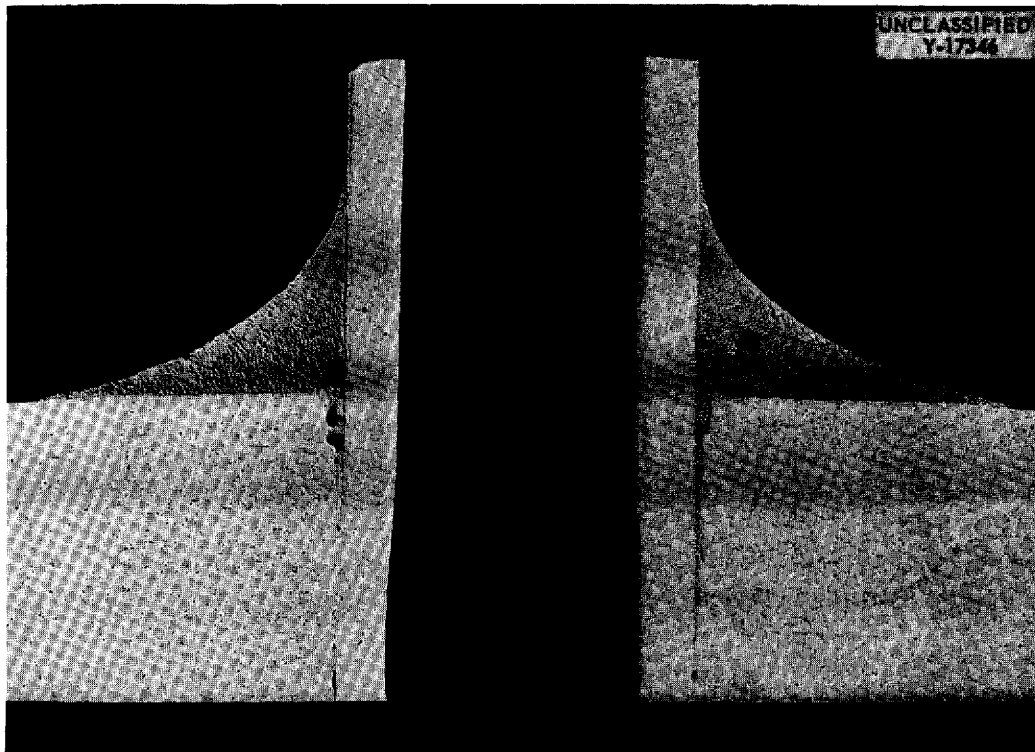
Cross Section of an As-Brazed Inconel Tube-to-Header Joint Showing Expanded Tube at the Bottom of the Header Plate; Brazed with Coast Metals Alloy No. 52 (89% Ni-5% Si-4% B-2% Fe). As polished. 10X.
